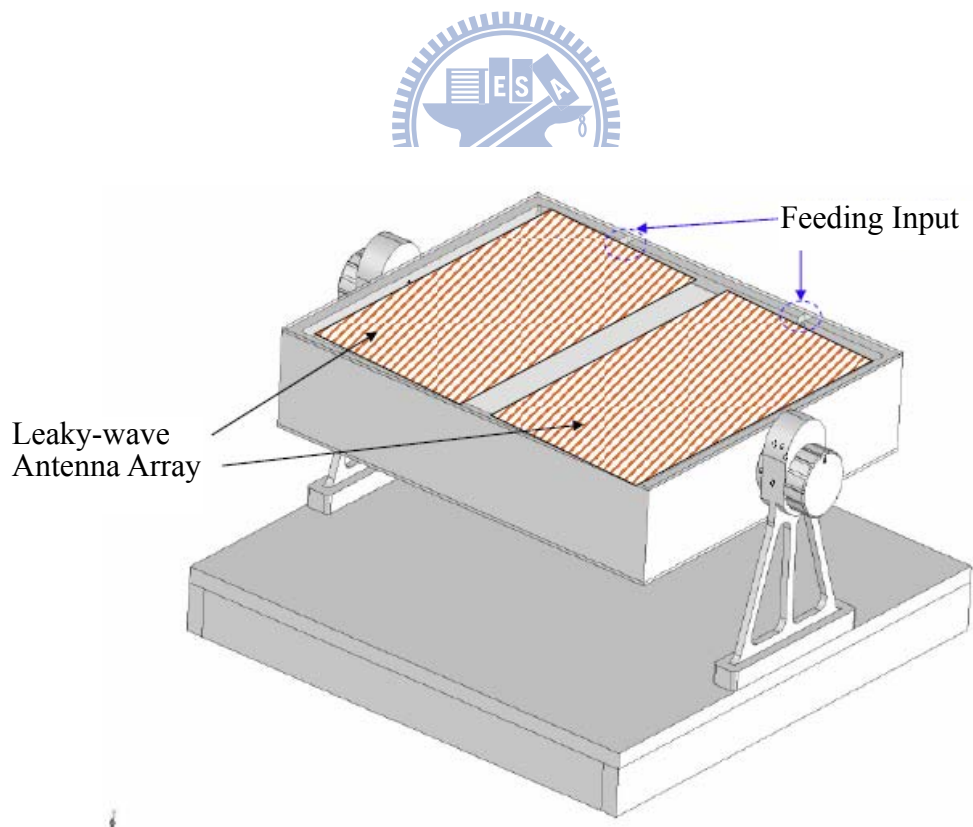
Mechanical drawing of the fixture with a CMOS transceiver and antenna arrays
